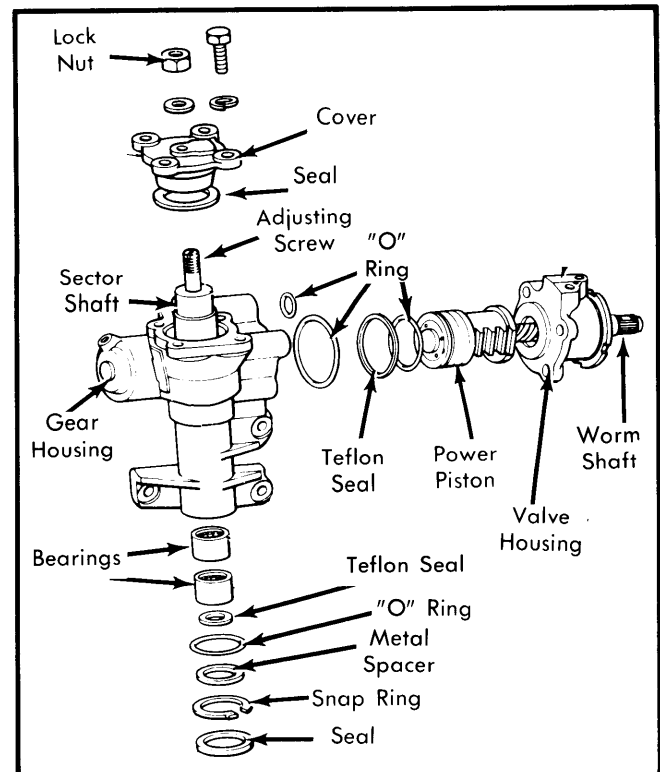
Exploded View of Toyota Power Steering Gear Assembly
